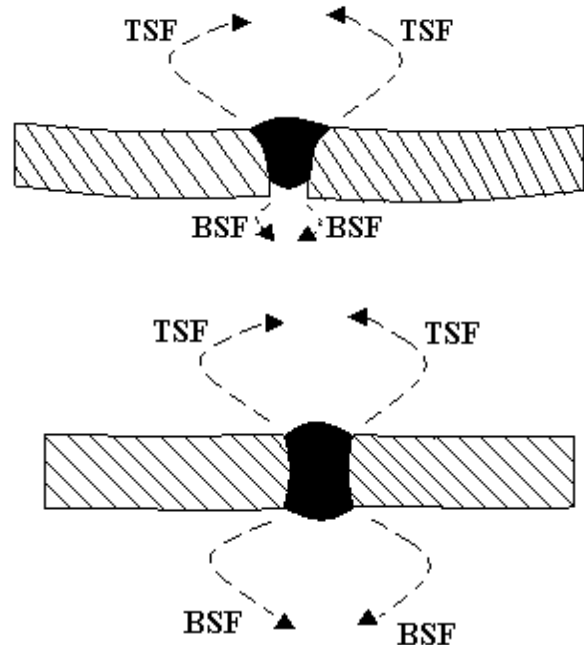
(a) A butt joint with greater top side shrinkage force (TSF) due to greater weld deposition at the top side; (b) A butt joint with near equal top side shrinkage force (TSF) and bottom side shrinkage force (BSF) (12).
